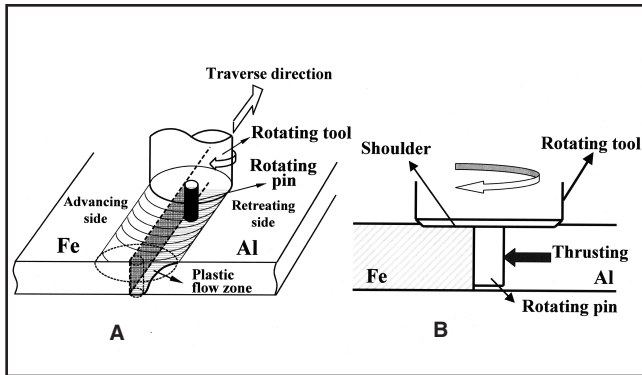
Schematic of the rotating pin position in this study: A — Bird's-eye view of the method; B — view of the cross section perpendicular to the weld interface.
